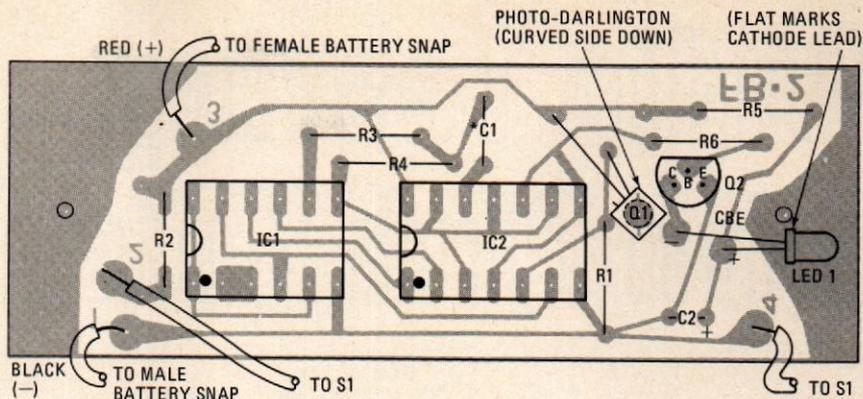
PRINTED-CIRCUIT BOARD shown full size.
